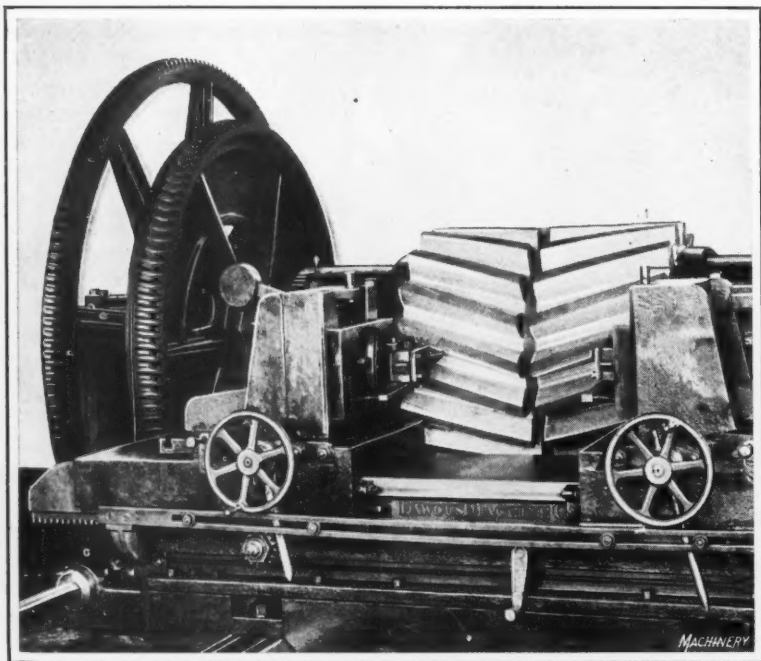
Cutting a Herringbone Pinion on a Double-helical Planer
